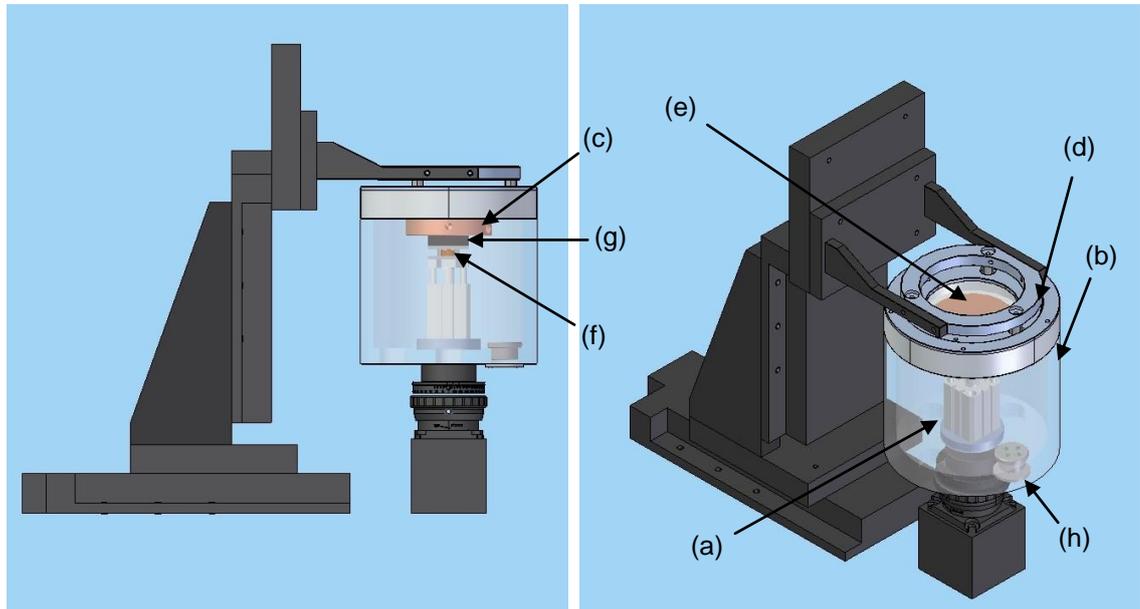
Sketches of new bonding setup with enlarged bonding chamber and integrated pneumatic cylinder
